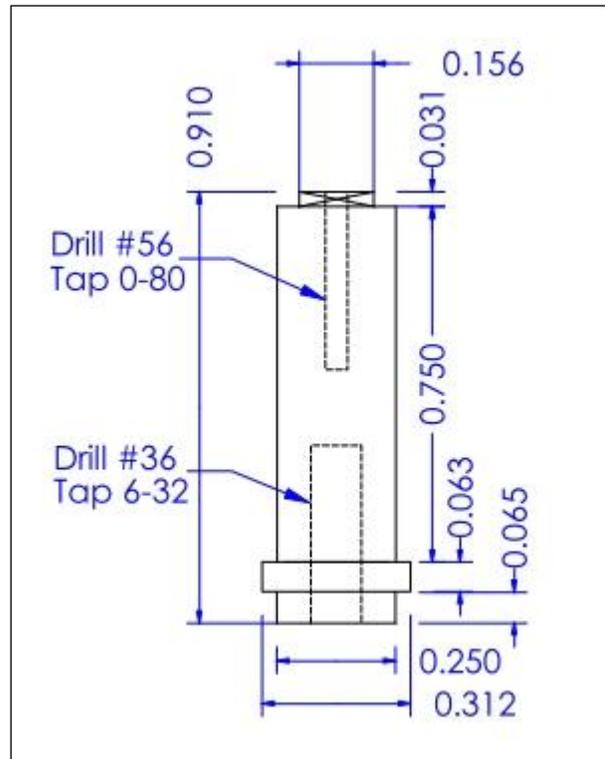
Construction drawing for the upper section of the minute pipe. Begin with a 1.25" length of 3/8" brass rod.
